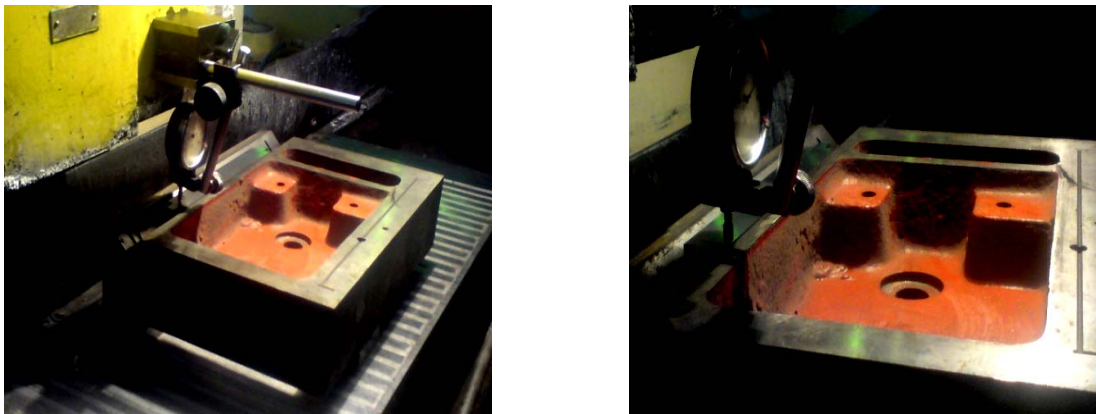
Images of the control detail, VJ and display rack with mercer clock gauge
